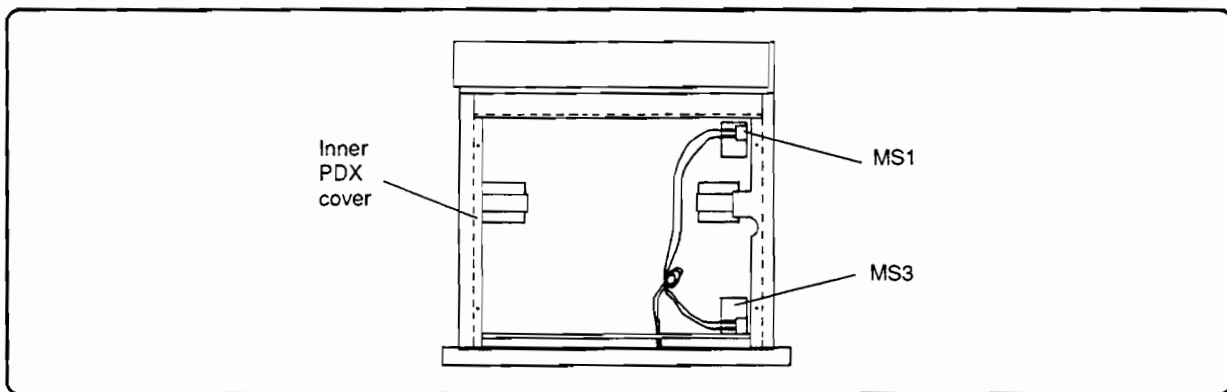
PDX-MS1 and PDX-MS3 Removal
